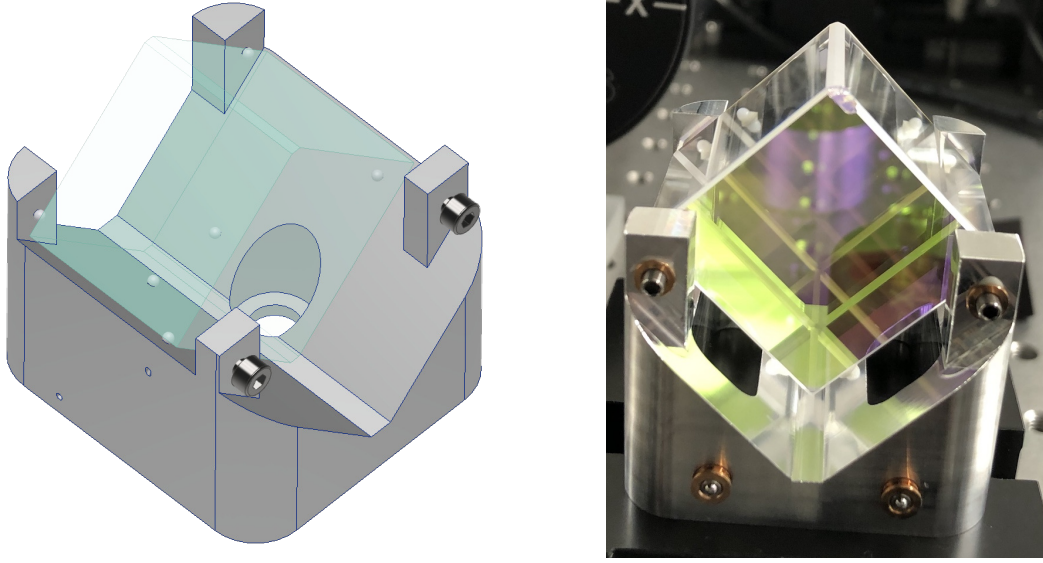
Test mass holder. Left: CAD drawing of the holder with the test mass sitting on top of the PTFE spheres that are inset into the holder. Right: Photo of the coated test mass inside the holder viewed in the direction of the laser.
